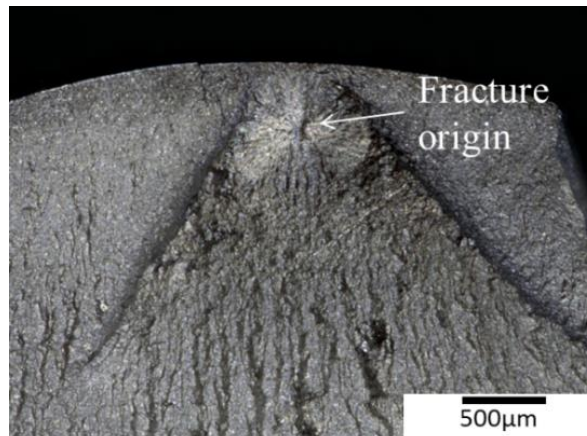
Fracture surface of γ' test specimen ($\tau_a = 609 \text{ MPa}$ $N_f = 1.03 \times 10^6$).
